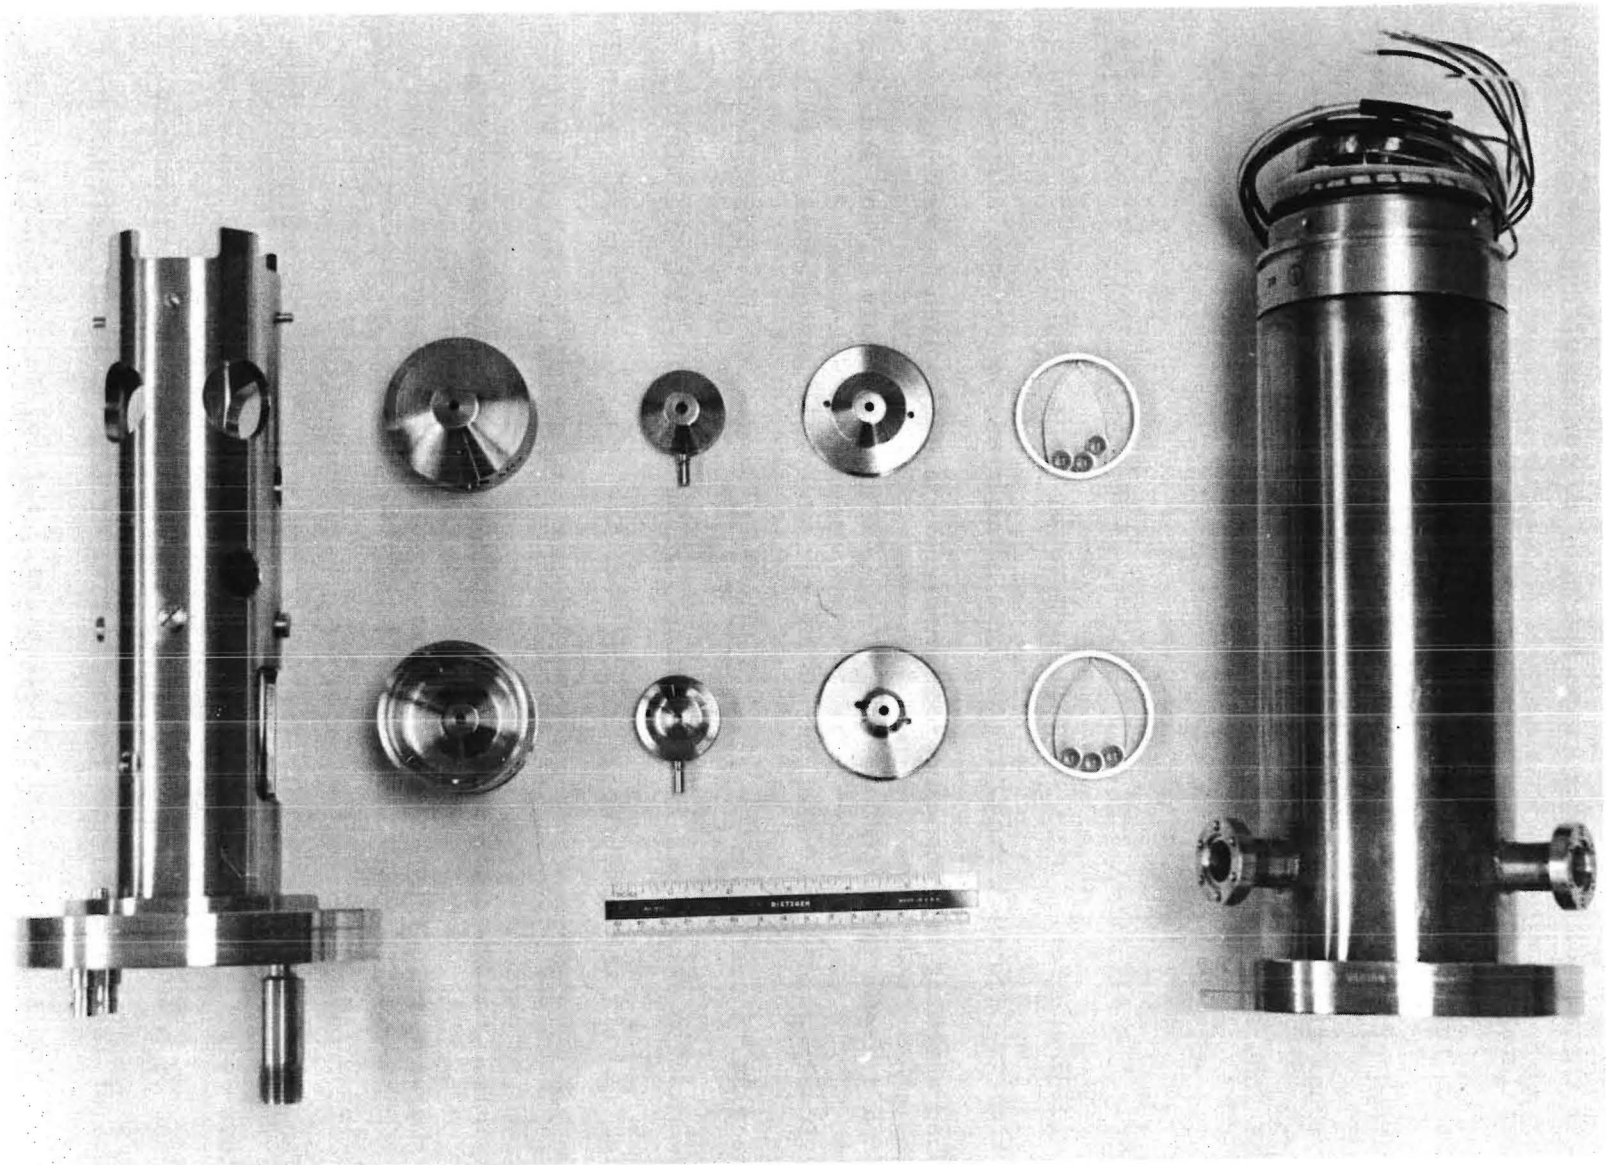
Exploded view of lens tube, lenses and vacuum housing.
